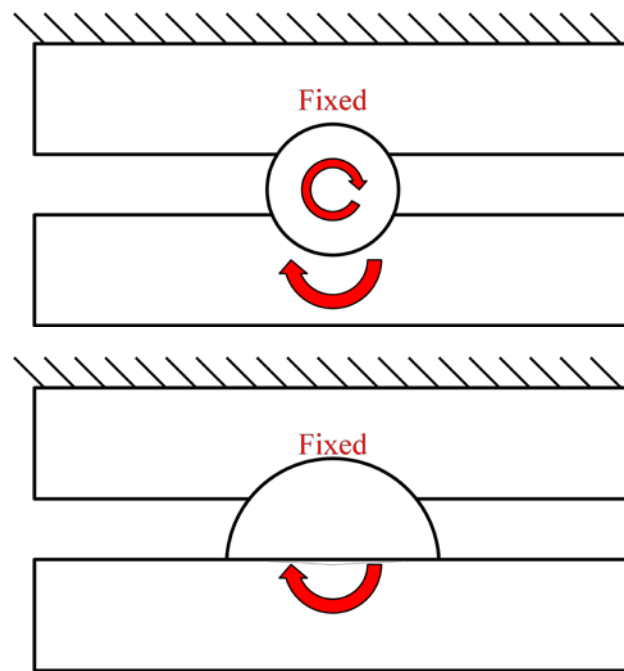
Schematic design differences between thesis fixture (top) and suggested fixture (bottom).
